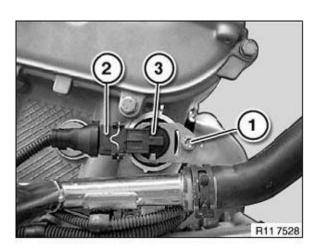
Identifying Screw, Solenoid Valve And Plug Connections Courtesy of BMW OF NORTH AMERICA, INC.
